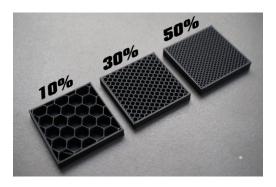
Infill. Picture taken from http://triplaxis.deviantart.com/art/3D-Printing-Infill-433183209
